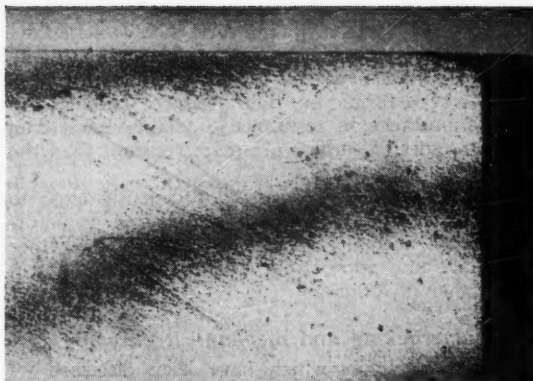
(a). Interference fringes on flank surface of tool before test (X40).
